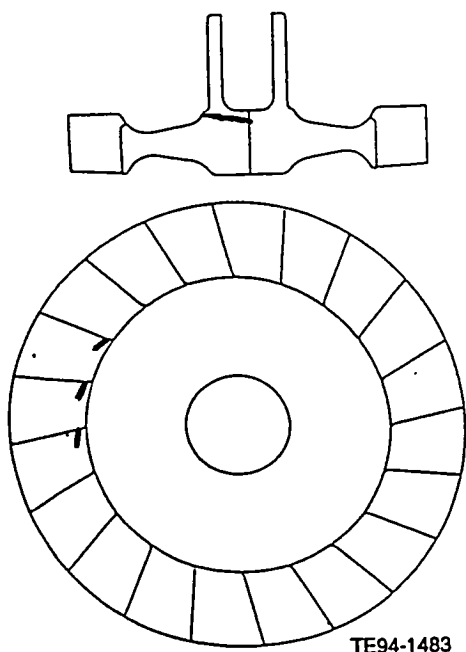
Persistent component defects for rotors (blade tears and shaft cracks).
